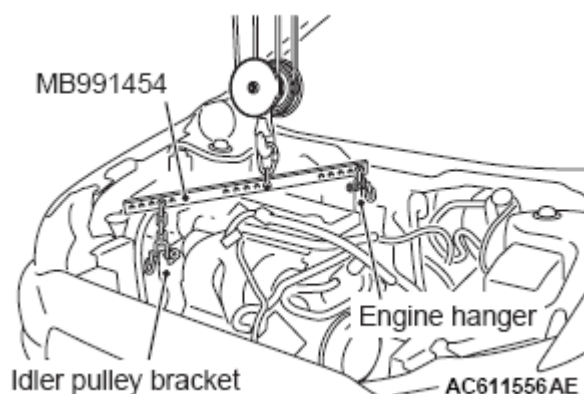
Securing Special Tool MB991454 To Engine Hanger And Idler Pulley Bracket
